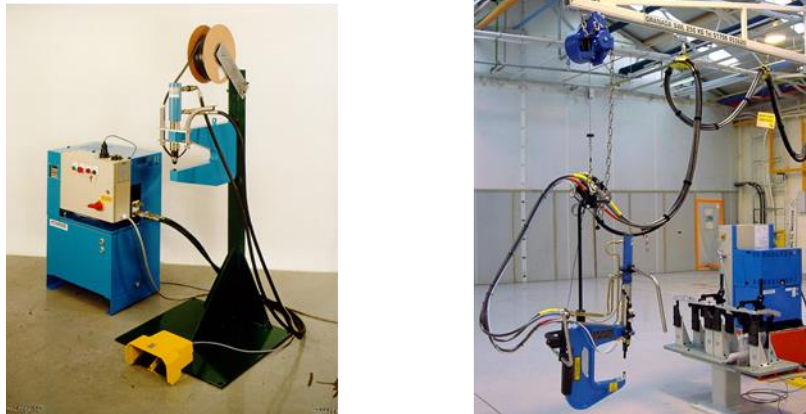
, Picture of stand mounted and hanger mounted hydraulic tools
